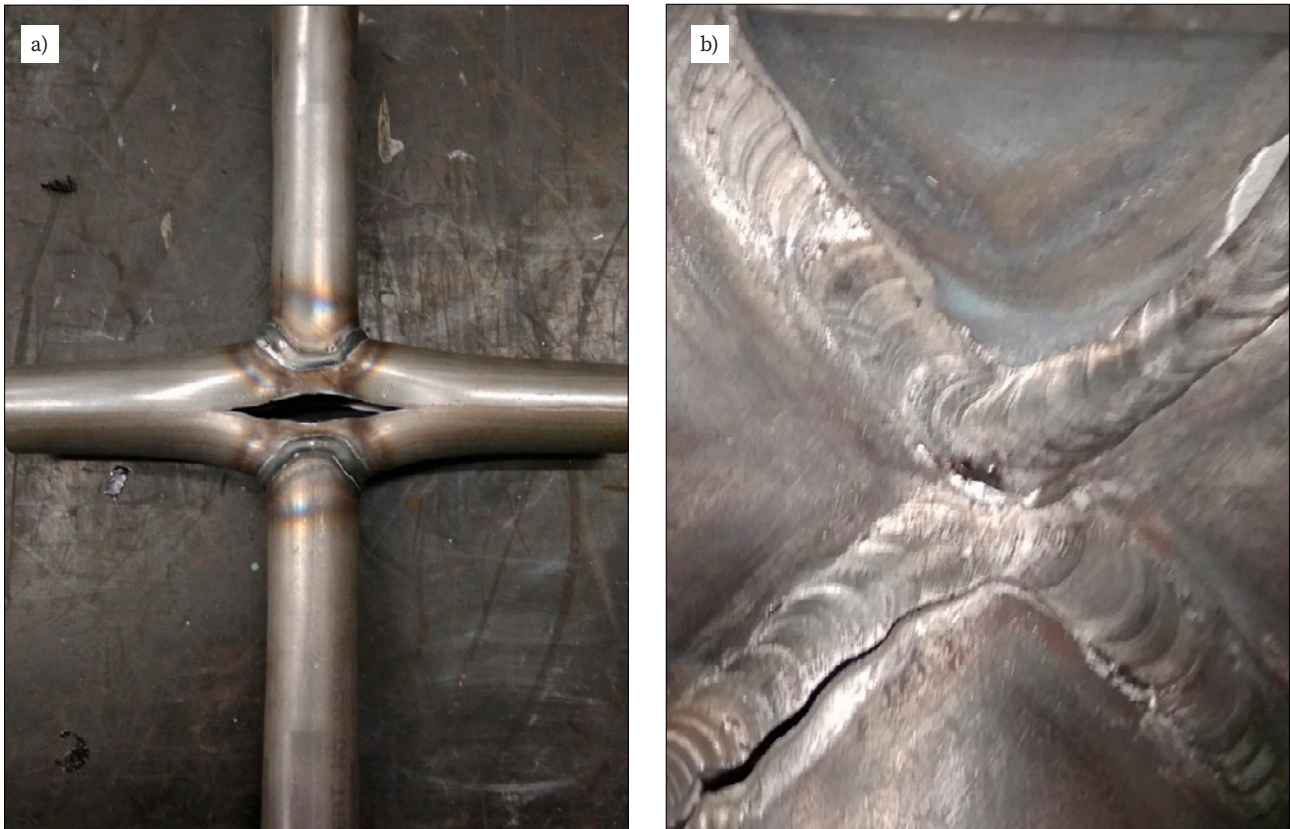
a) MAG-welded specimen after the tensile test and b) TIG weld after the tensile test
